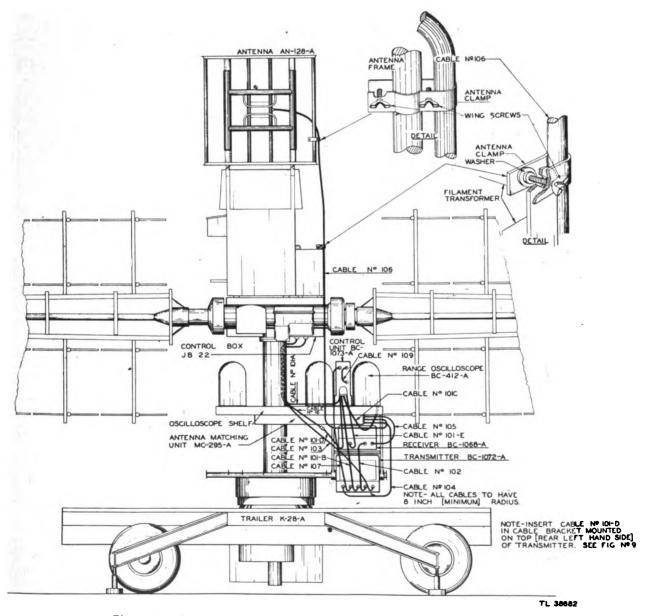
Arrangement of cables for Radio Equipment RC-148 and RC-148-B.
